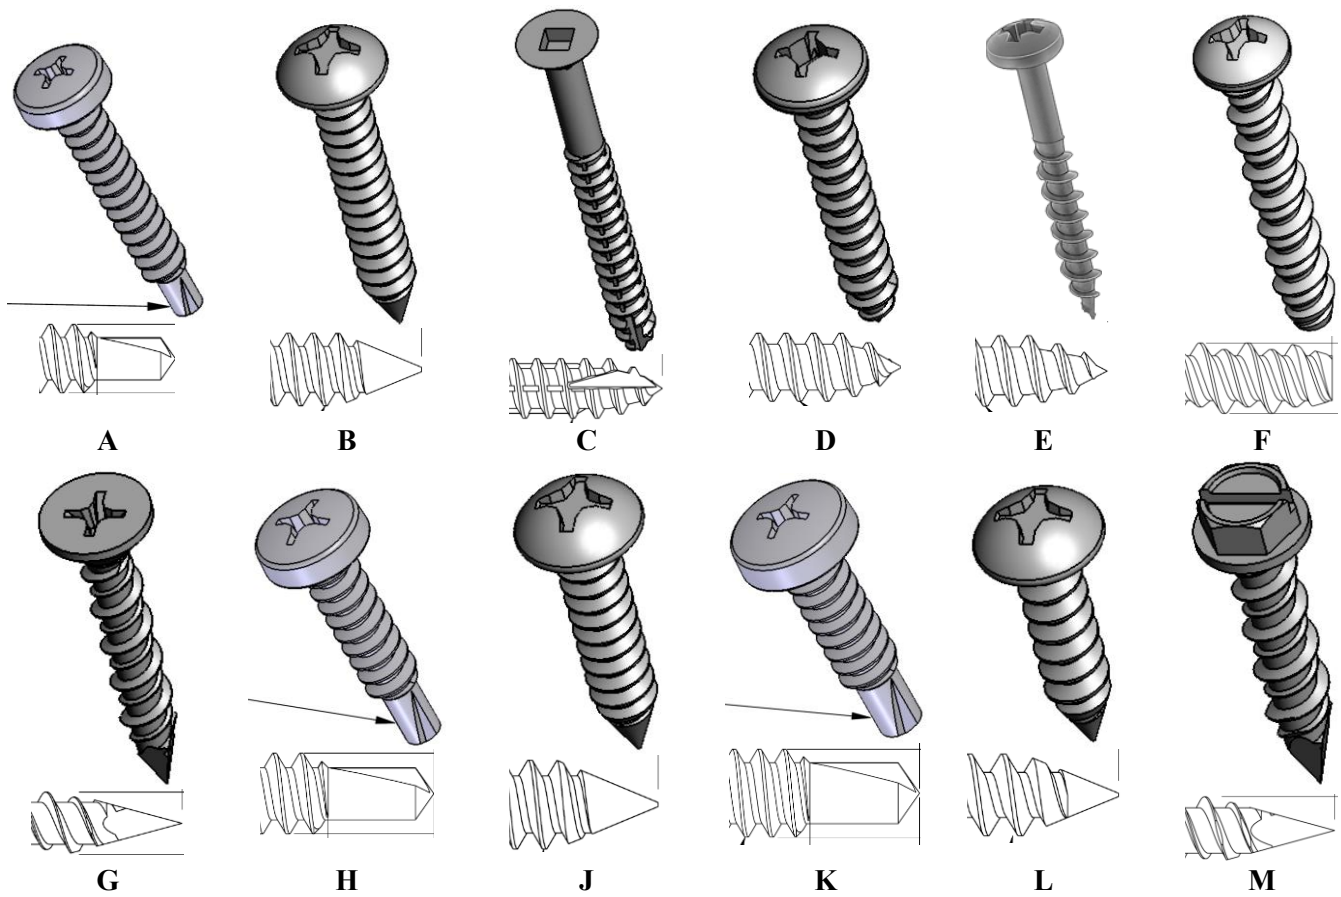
Screw types used in this study (not to scale; images from supplier-provided CAD drawings).
